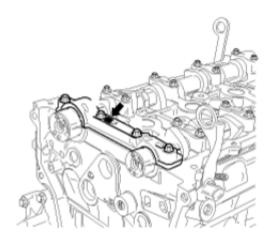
Locating Cylinder Head Bore Mark Courtesy of HYUNDAI MOTOR CO.
